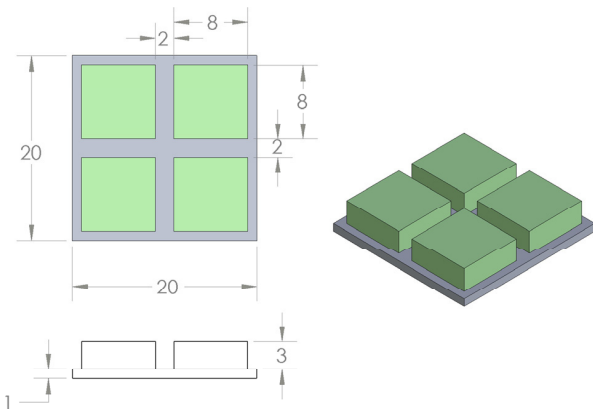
Sample geometry for AA6061 and Al-Si AM builds. Dimensions are in mm.
